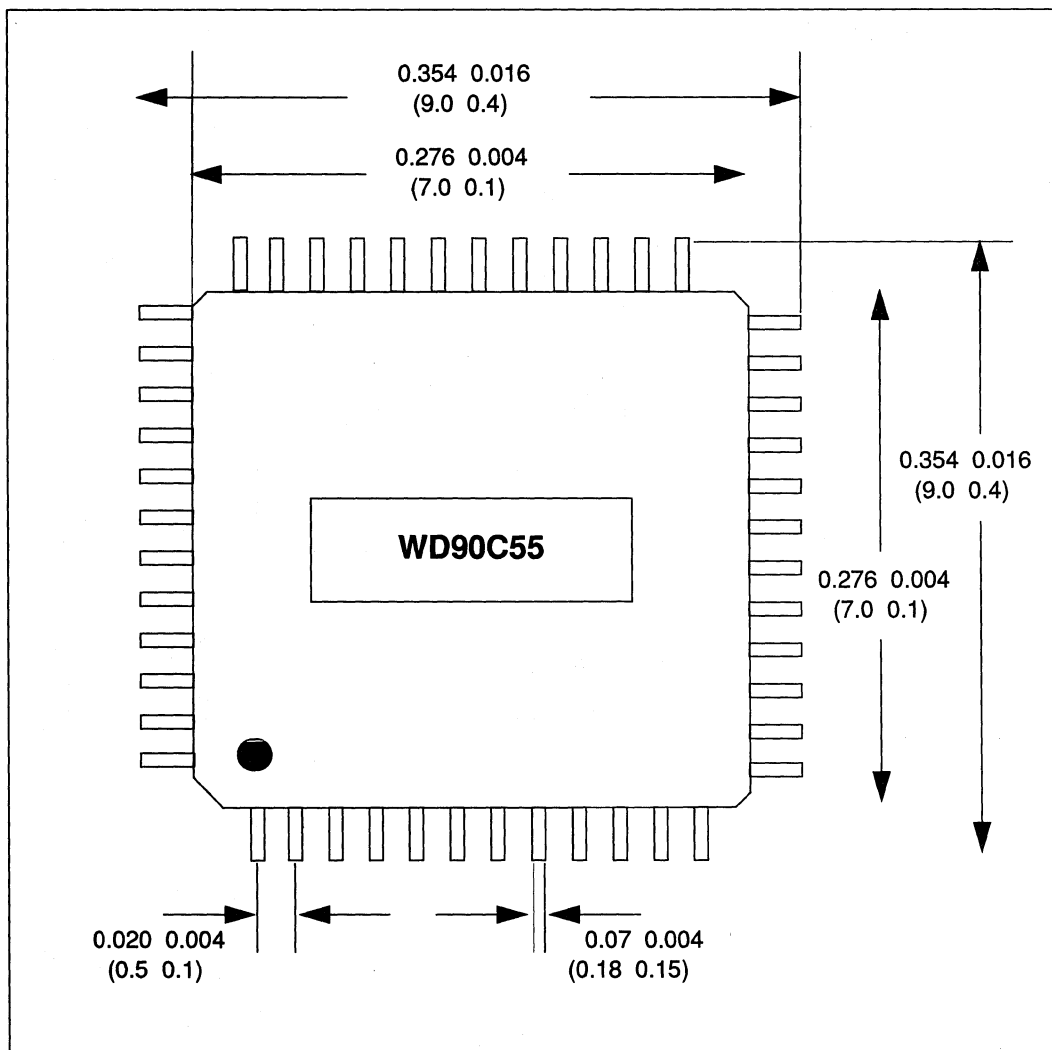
48-PIN LAYOUT MECHANICAL SPECIFICATION
